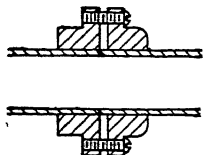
Contact Coupling (Courtesy McGraw-Hill Book Co.)
